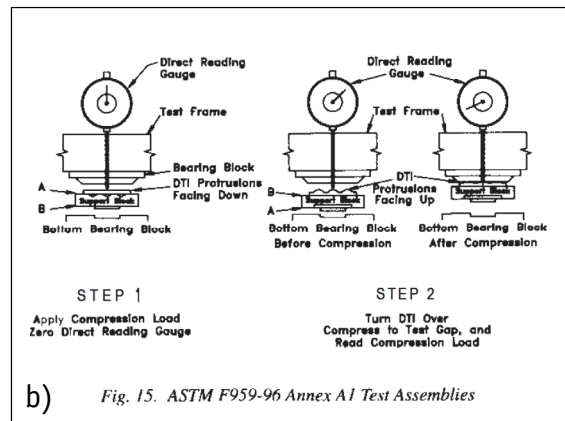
ASTM F959-96 Annex A1 Test Assemblies
